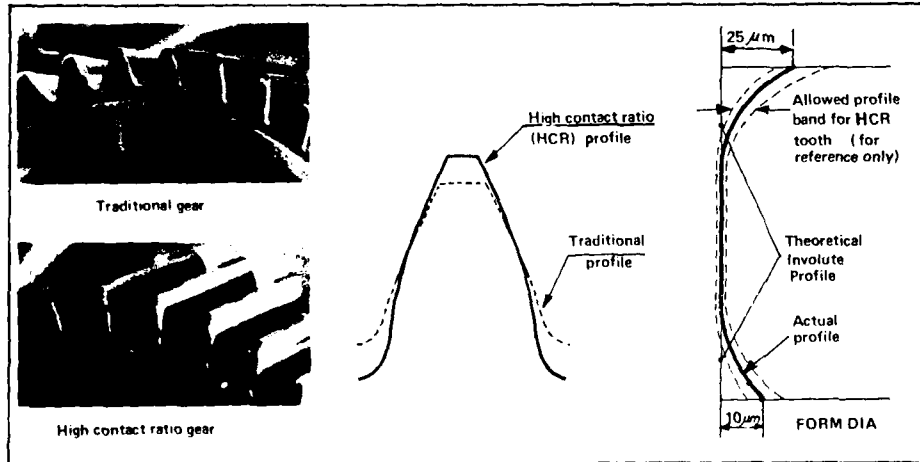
Application of HCR gears in the gearbox of a helicopter gearbox
